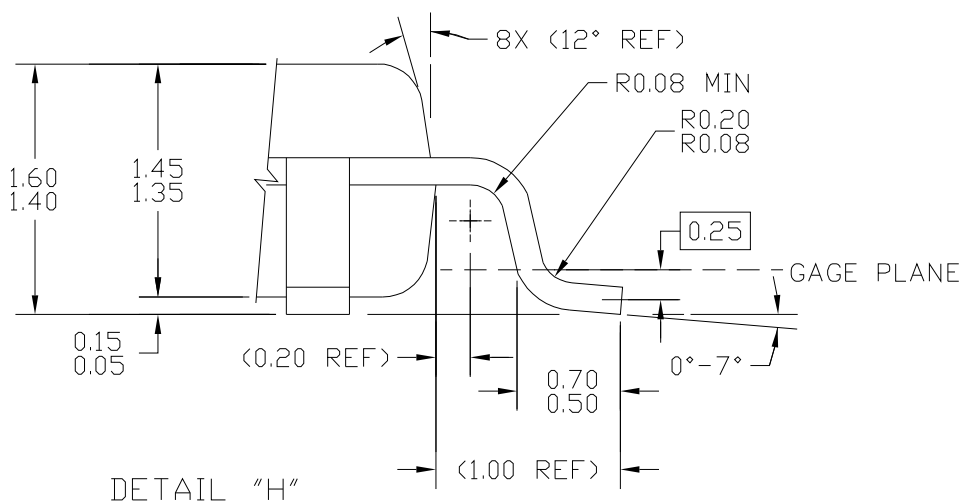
32-pin LQFP Package Drawing (Case 873A, Doc #98ASH70029A), Sheet 2 of 3
